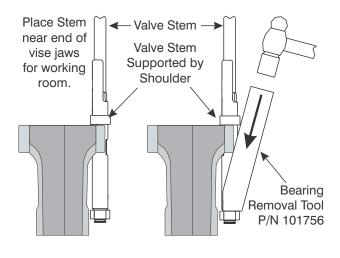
Drive the Spherical Bearing from the Valve Stem.
